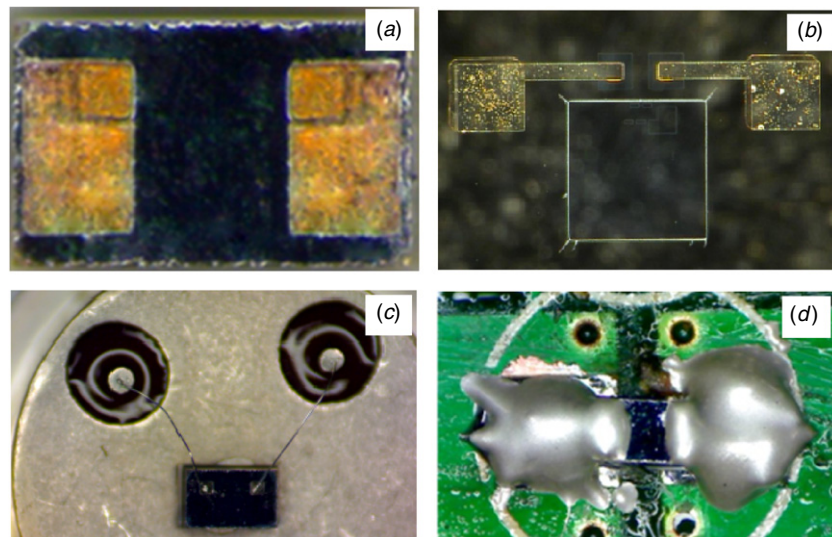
Micrographs before and after sensor chip packaging. (a) and (b) show the top and bottom views of the chip, respectively, and (c) and (d) show the views of sensor packaged in TO5 housing and PCB, respectively.
